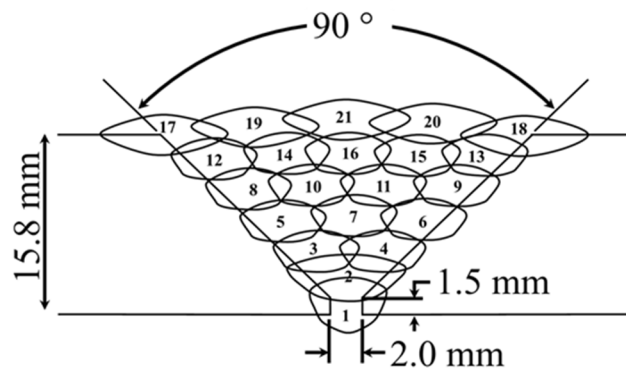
Schematic drawing of weld joint geometry highlighting the welding procedure, pass structure and relevant dimensions
